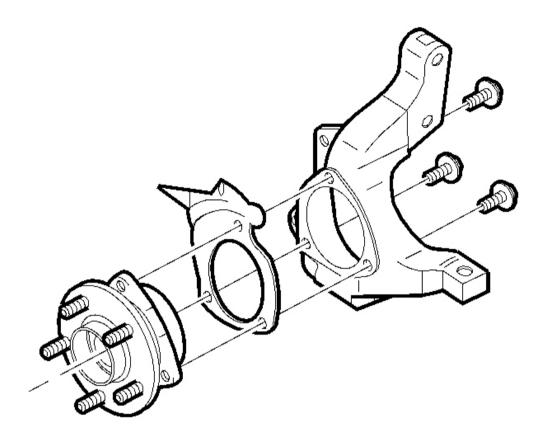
Wheel Bearing/Hub & Mounting Bolts Courtesy of GENERAL MOTORS CORP.
